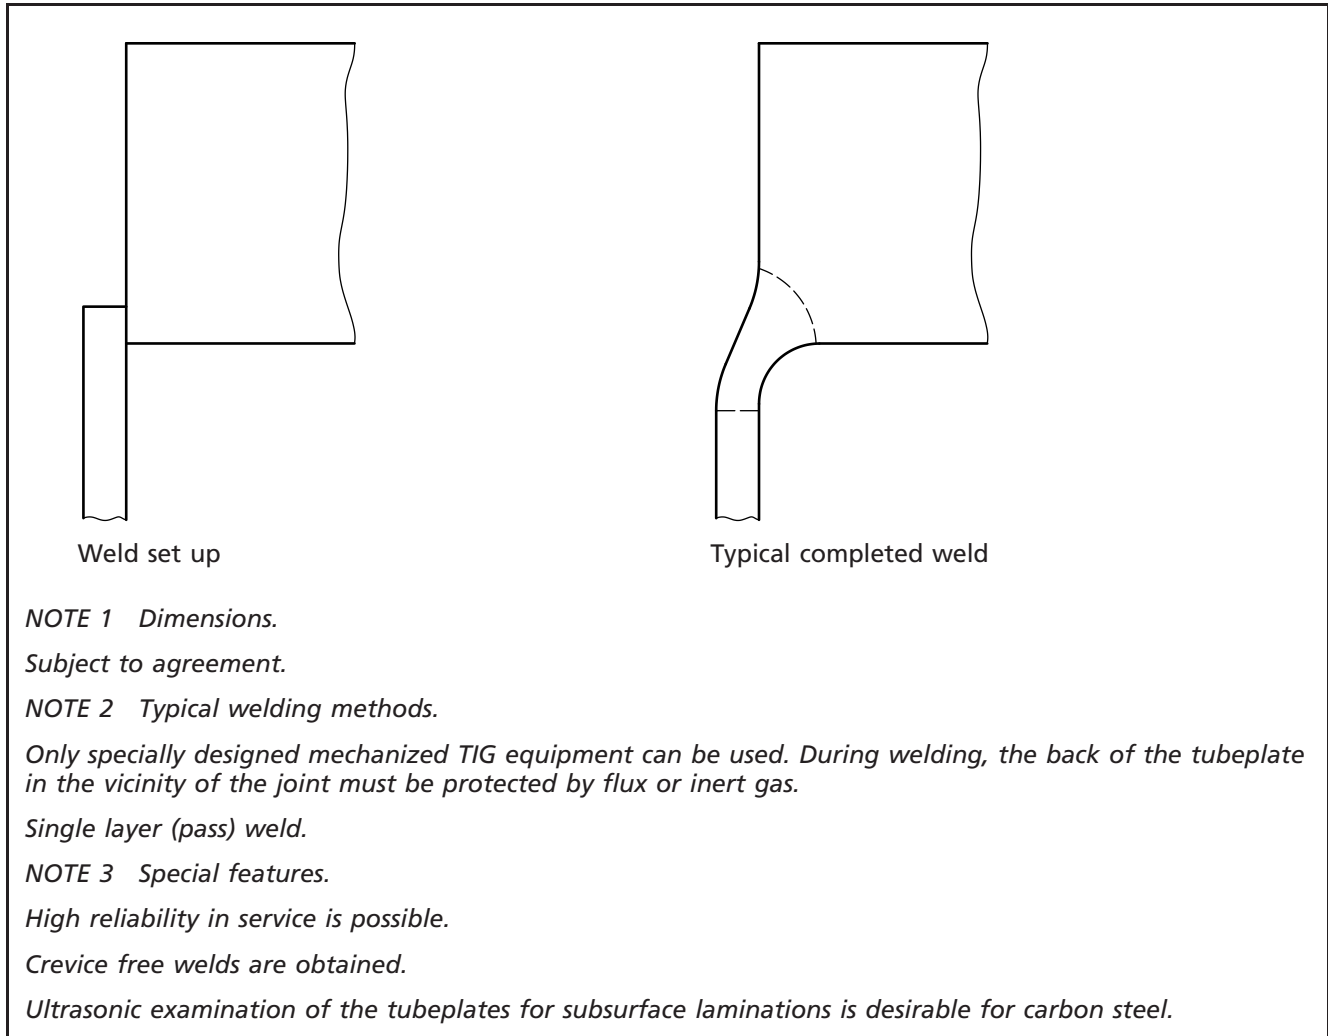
Tube to tubeplate connections, back face stub bore weld
